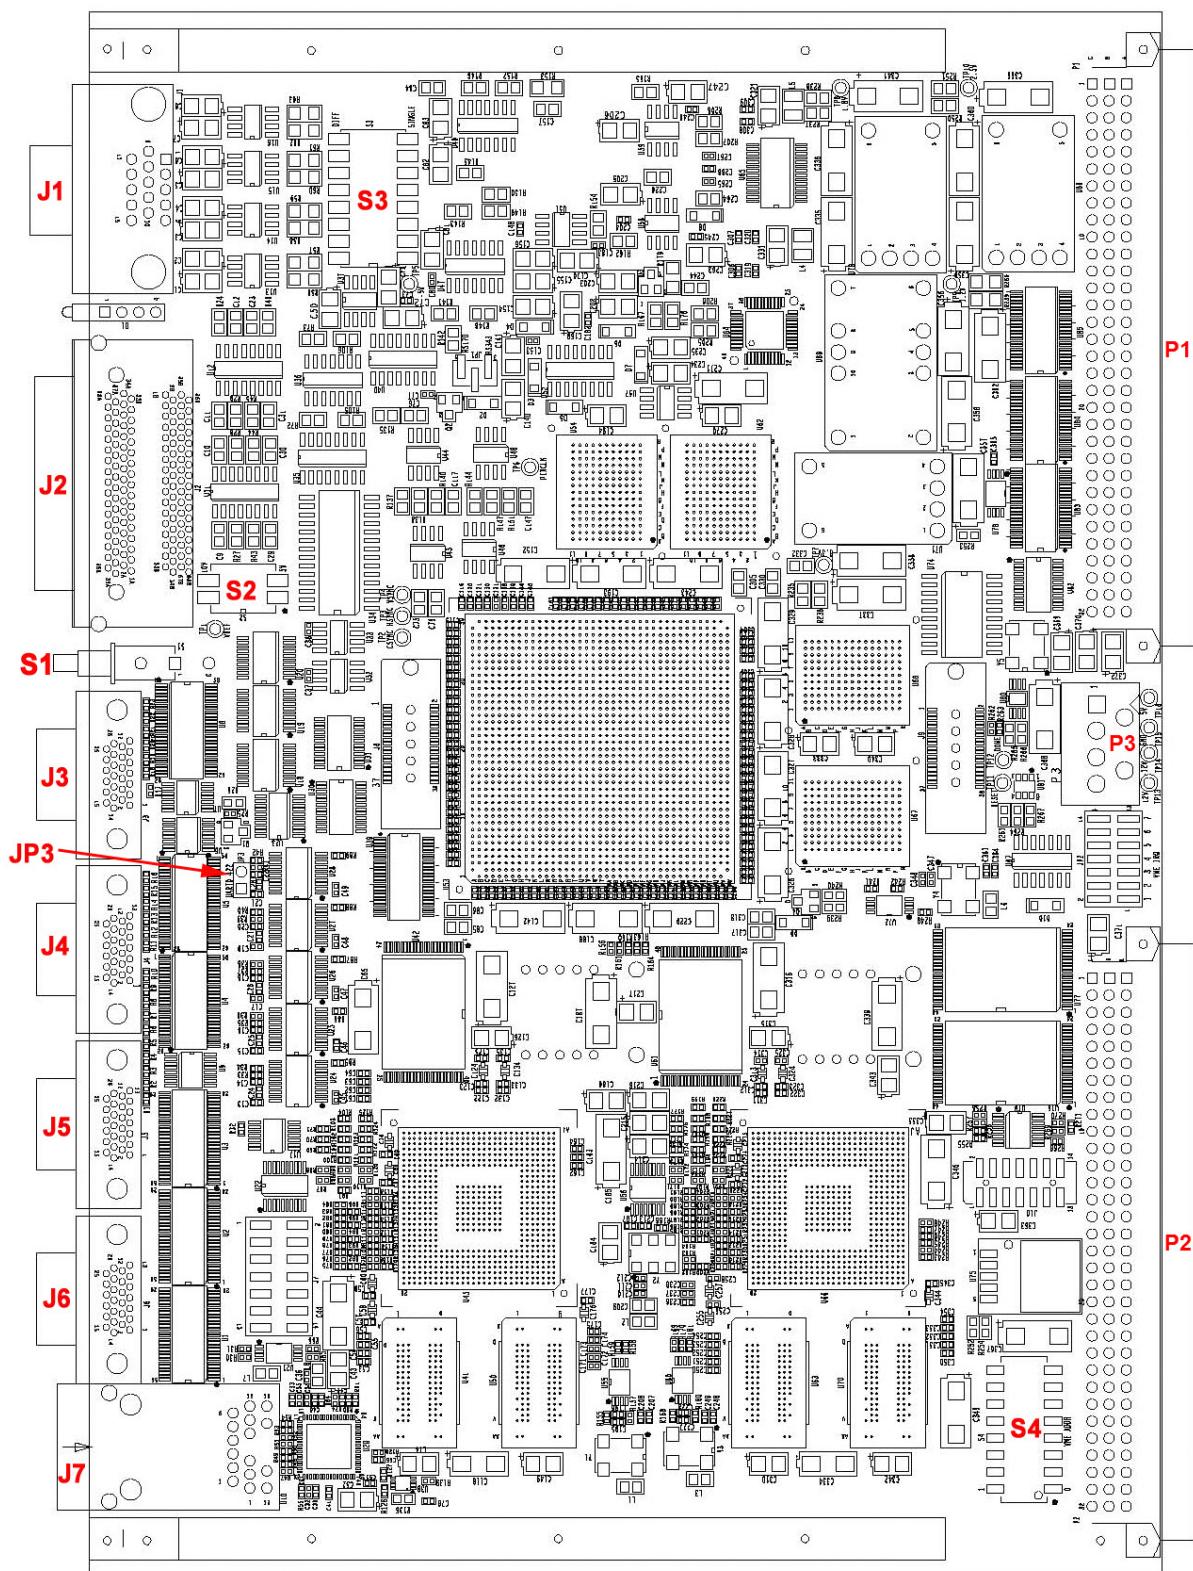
Model 7005-CL/7006-CL R1 VMEbus Tracker Board Top Assembly
